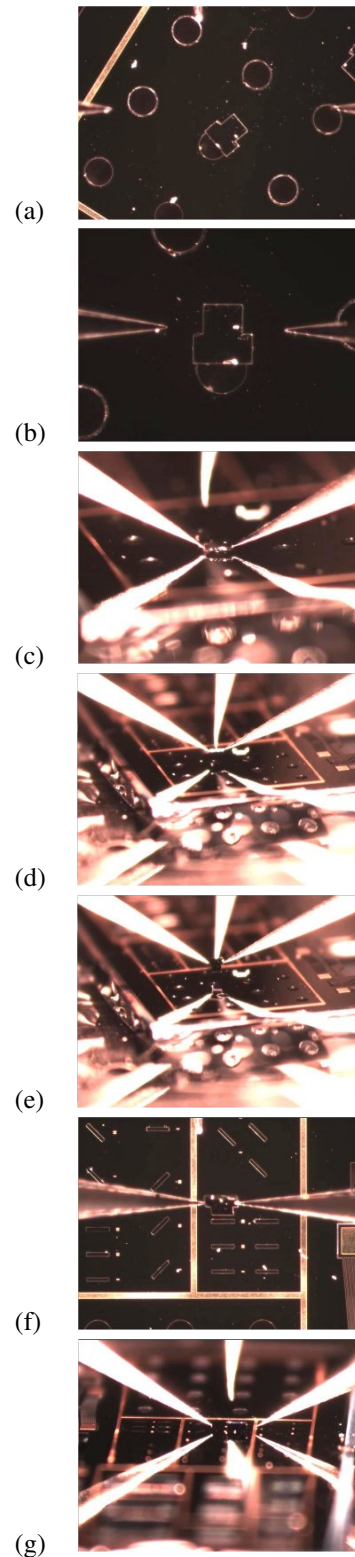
(a) Initial Part Position (b) Part rotated and probes moved close to part (c) Probes gripping part after automated sequence (d) Part at start of out of plane rotation (e) Part after out of plane rotation (f) Part and slot pre-aligned (g) Part inserted
